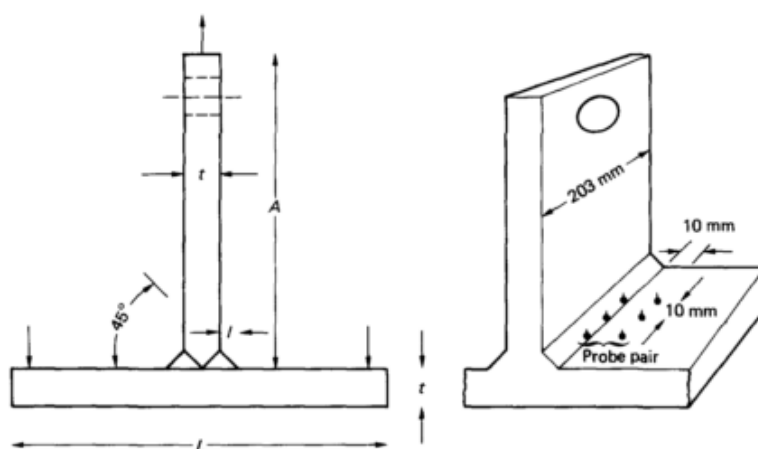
Schematic of ACPD crack growth monitoring probe pair setup at the weld toe. From [63].
